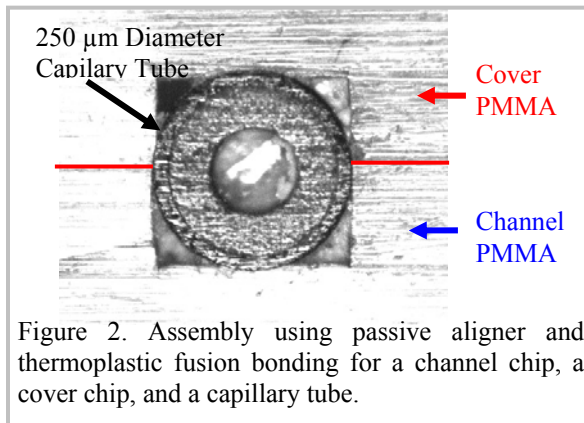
Assembly using passive aligner and thermoplastic fusion bonding for a channel chip, a cover chip, and a capillary tube.
